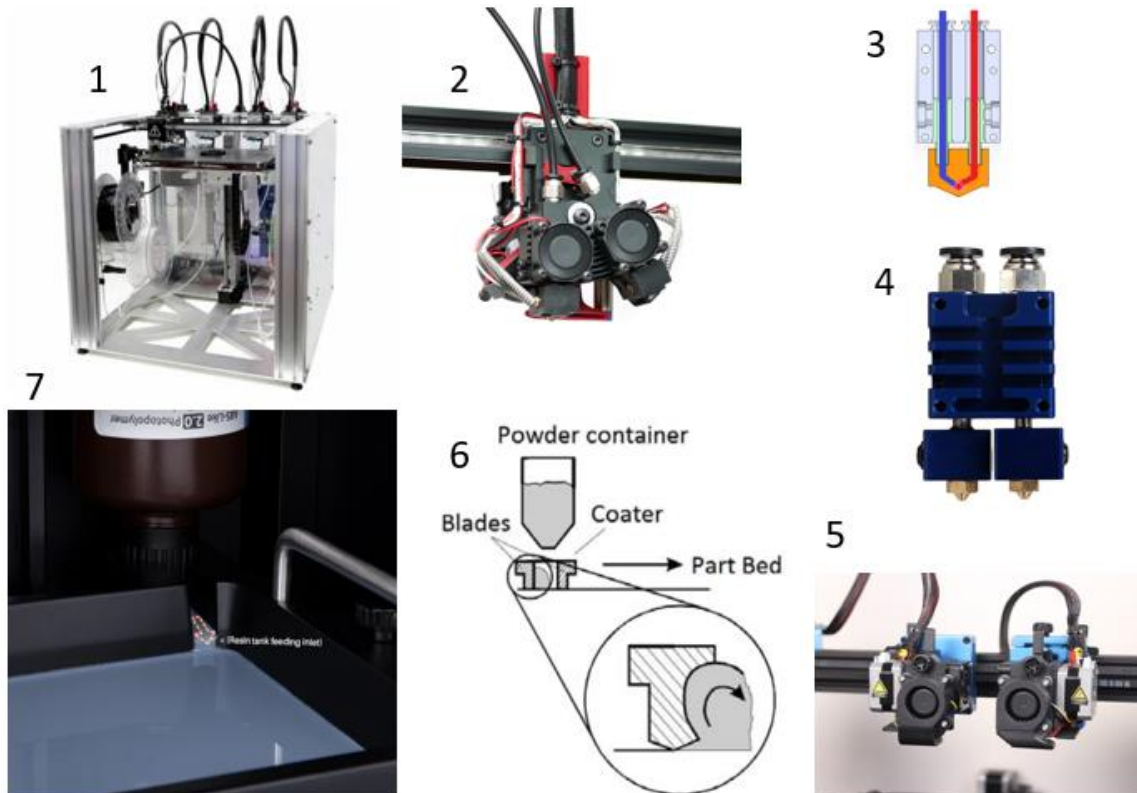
A collection of dual extrusion methods. 1 is a tool changer [47], 2 is a switching head [48], 3 is a mixing head [49], 4 is a dual extruder [50], 5 is an independent dual extruder [51], 6 is a recoating blade [52] and 7 is a reservoir feed [53]
